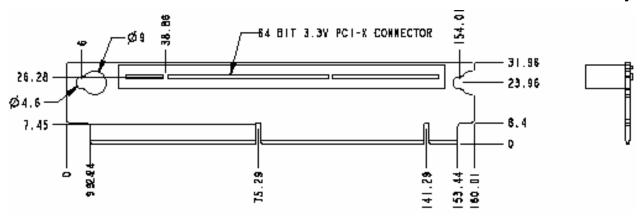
1U Full Height PCI-X Riser Card Mechanical Drawing
